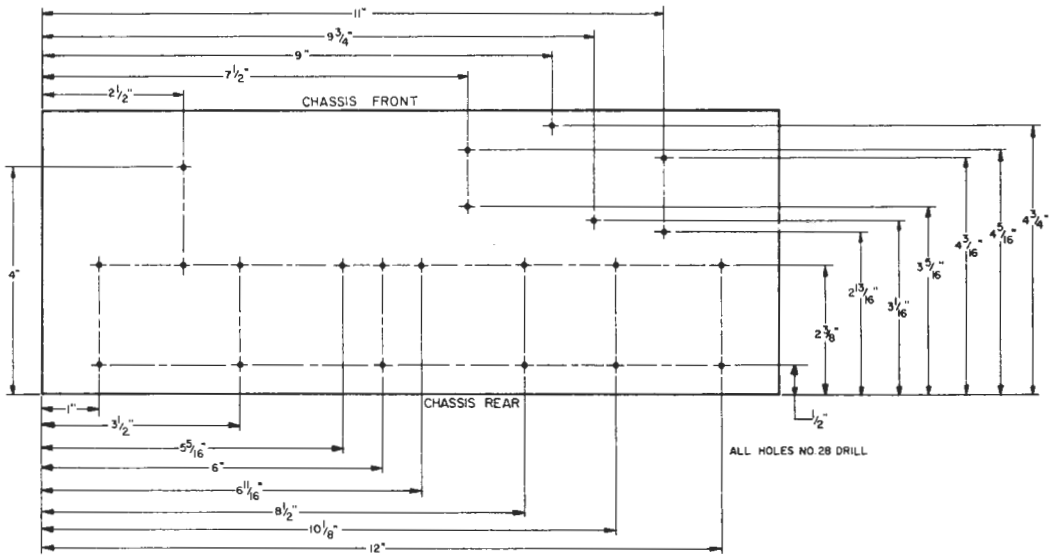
Location of holes on the top of the chassis. See text before drilling any holes.
